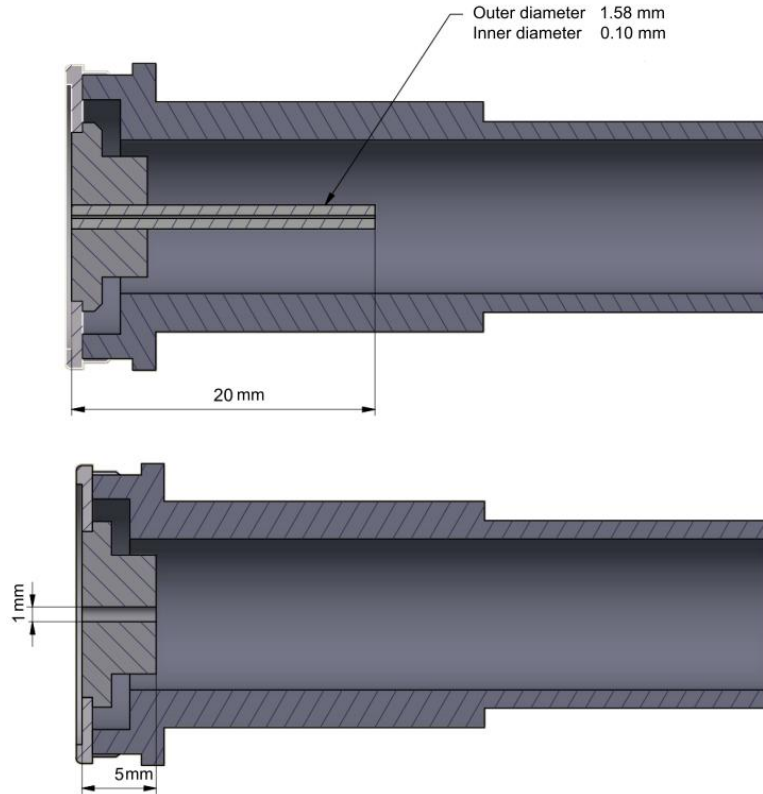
Technical drawing of the differential pumping section. This drawing shows capillary DPS1 at gas inlet (above) and DPS2 behind the cold trap and its dimensions. In the final setup, the length of DPS1 has been changed to 100 mm.
